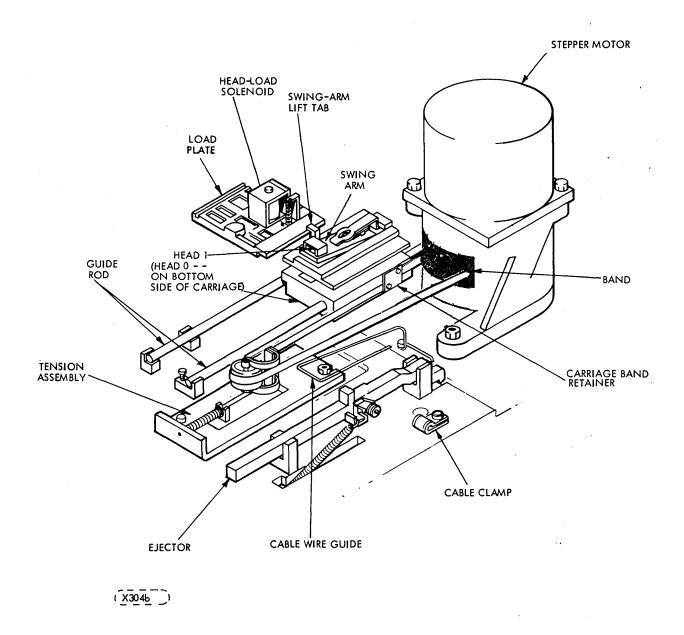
Head-Load Carriage and Stepper Motor Details.
